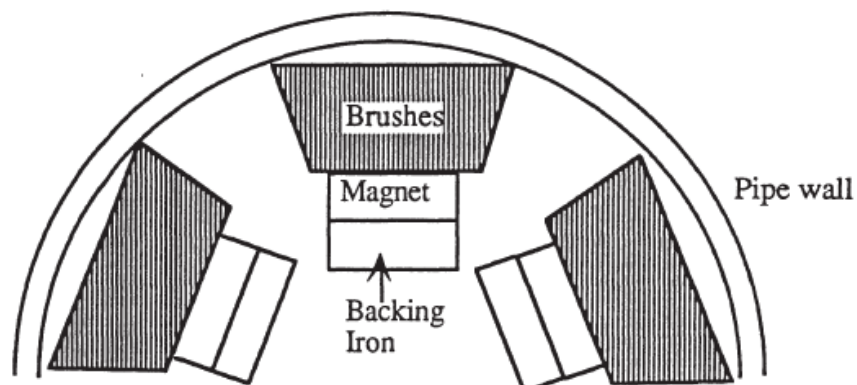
Cross sectional View of the Tool inside a Pipe [1]
